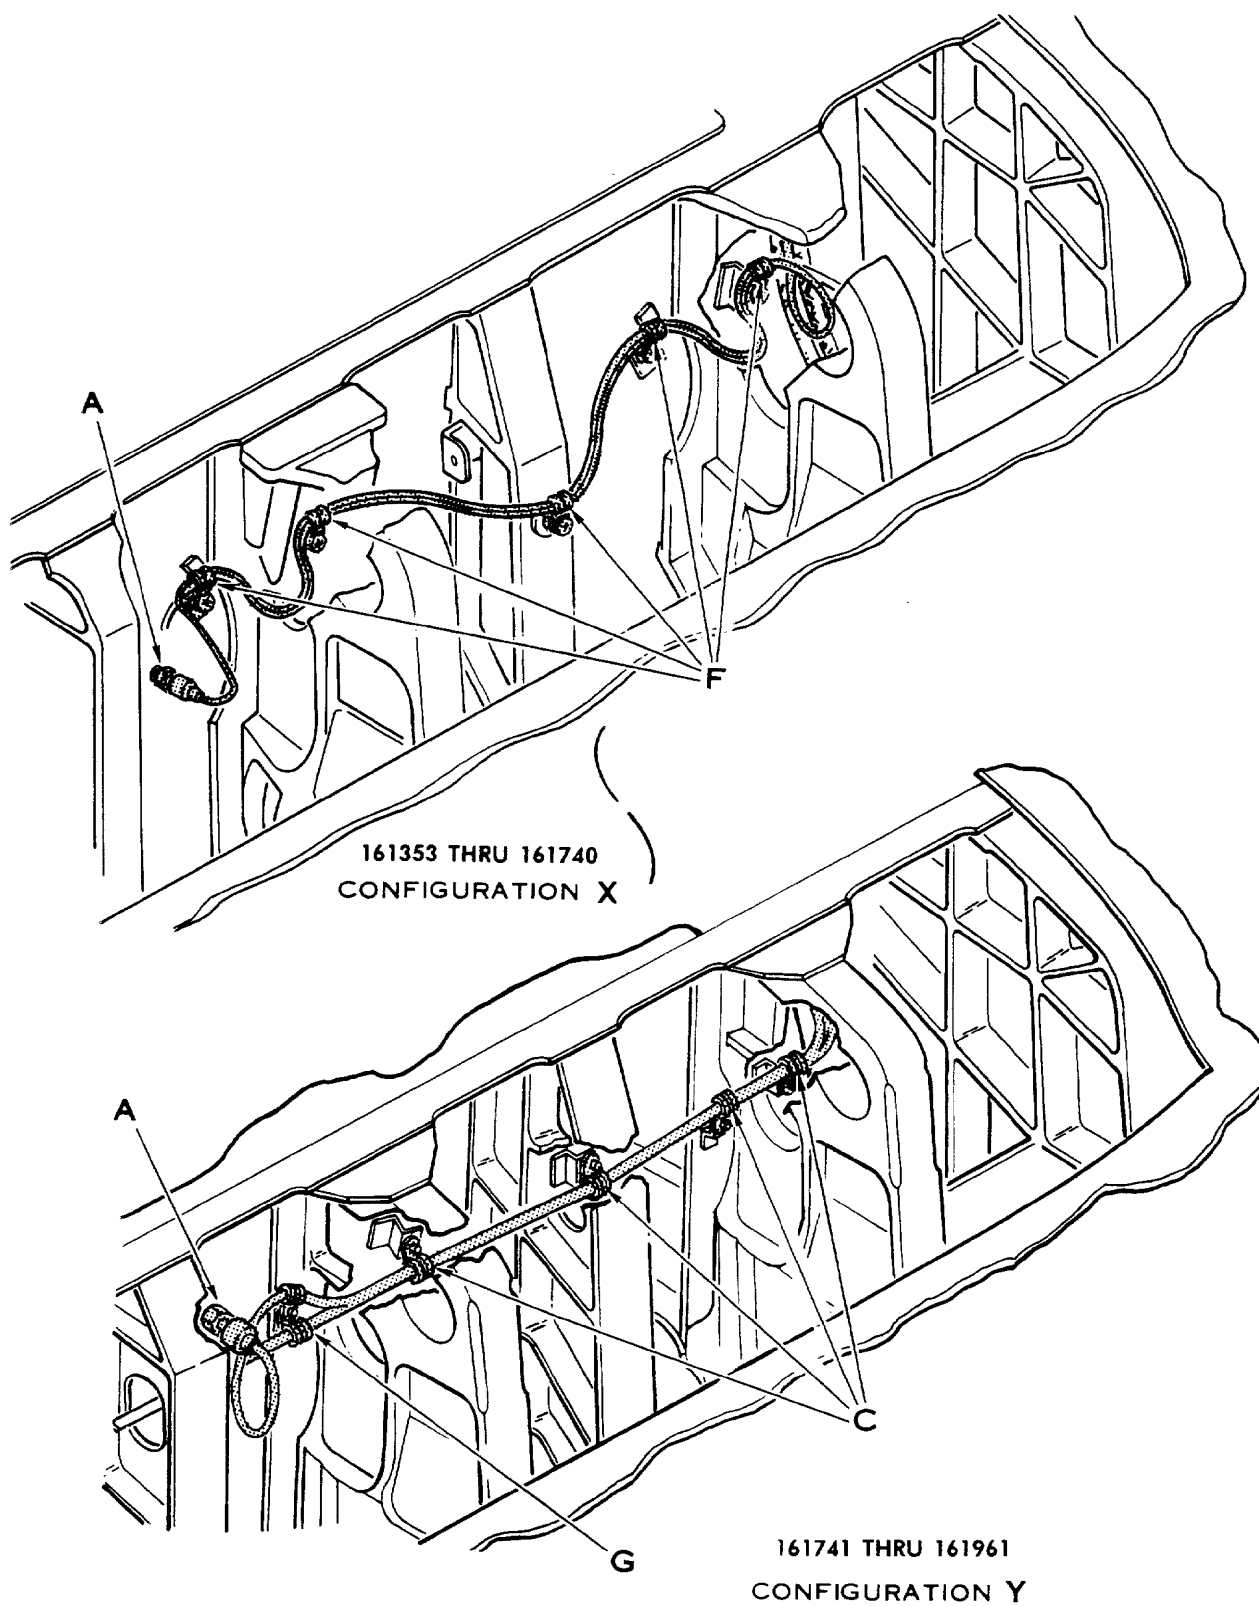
Fuselage Transfer Pressure Transducer (5MTP126) (Sheet 2)
